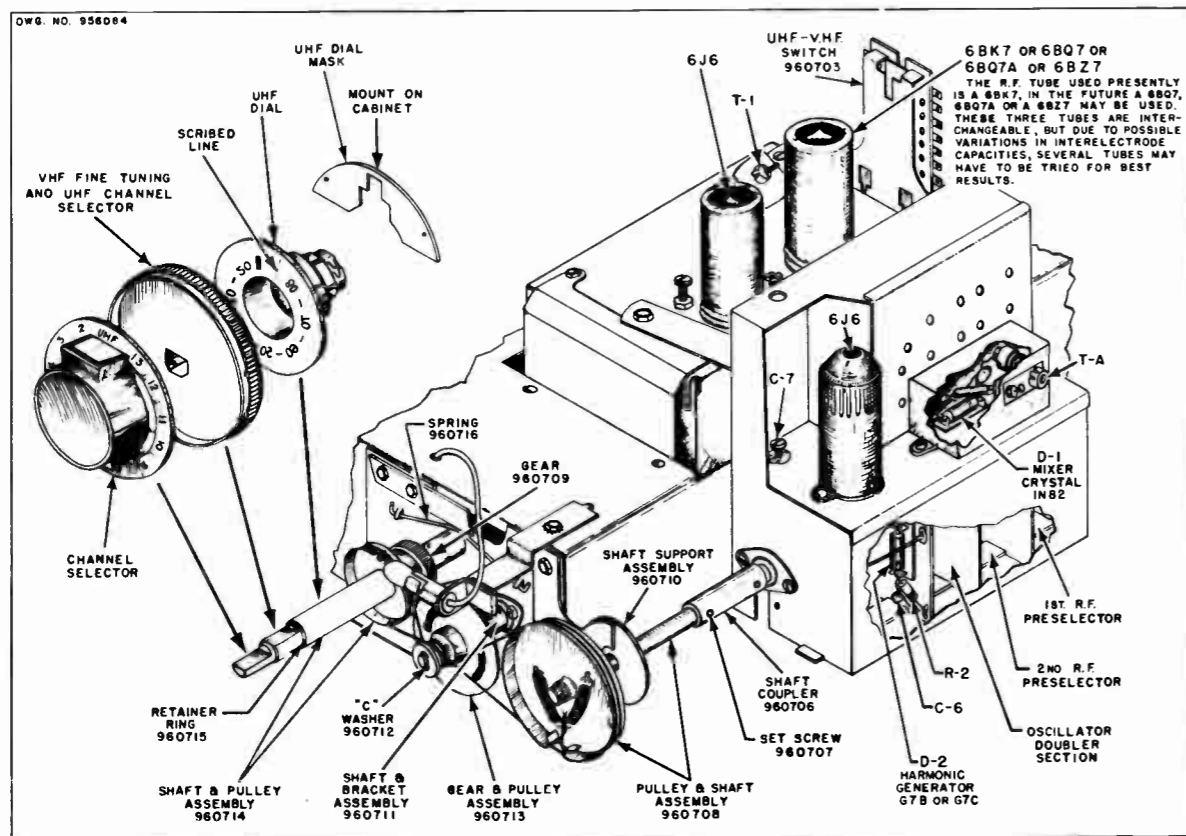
UHF-VHF TUNER ASSEMBLY DRAWING
